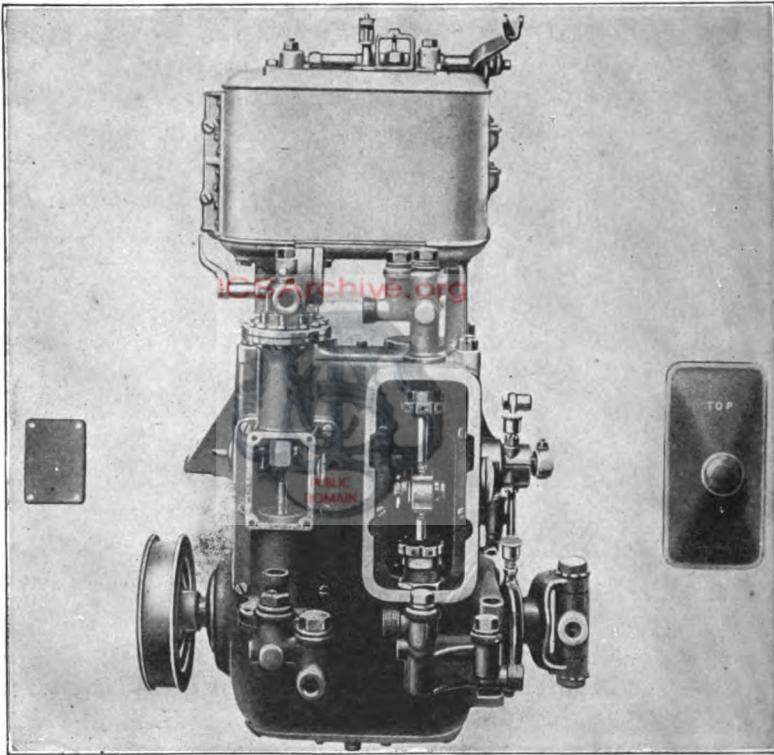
White Steam Engine—Left Side—with Pump Covers Removed
